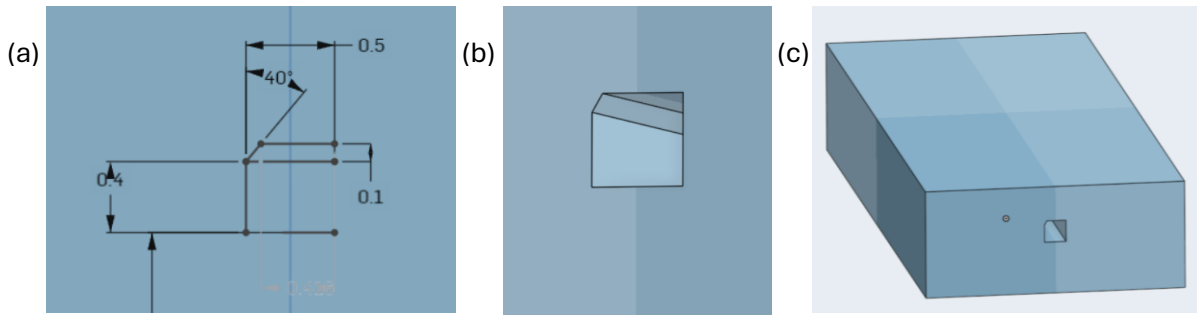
3D model of specimen with chamfer, detailed dimensions (a), close-up (b) and general view (c)
